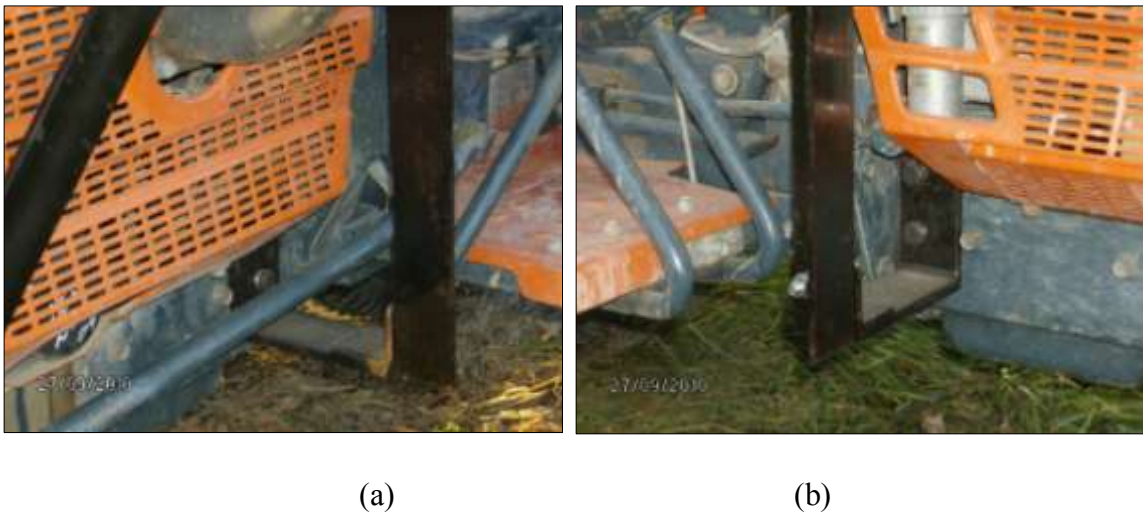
Brackets bolted to the tractor chassis: (a) left side and (b) right side.
